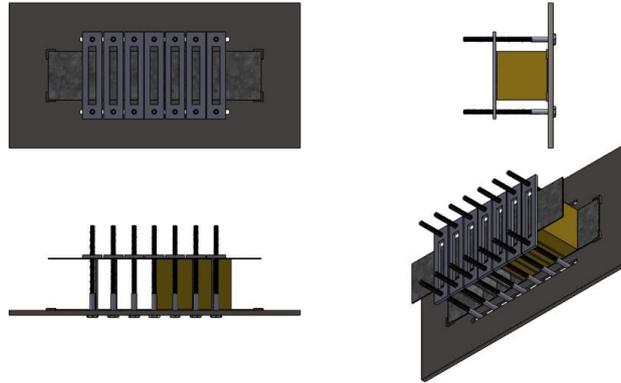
Welding jig to setup a web-core sandwich structure
